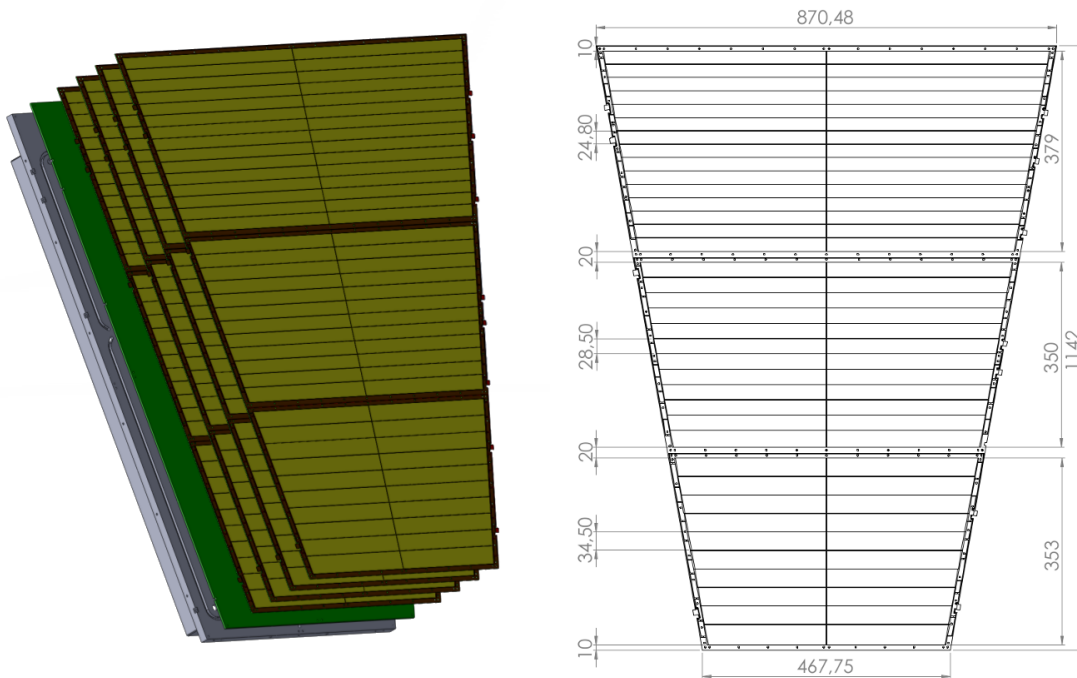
Left: Exploded view of a GEM OROC. Right: dimensions (in mm) of a OROC GEM-foil.
